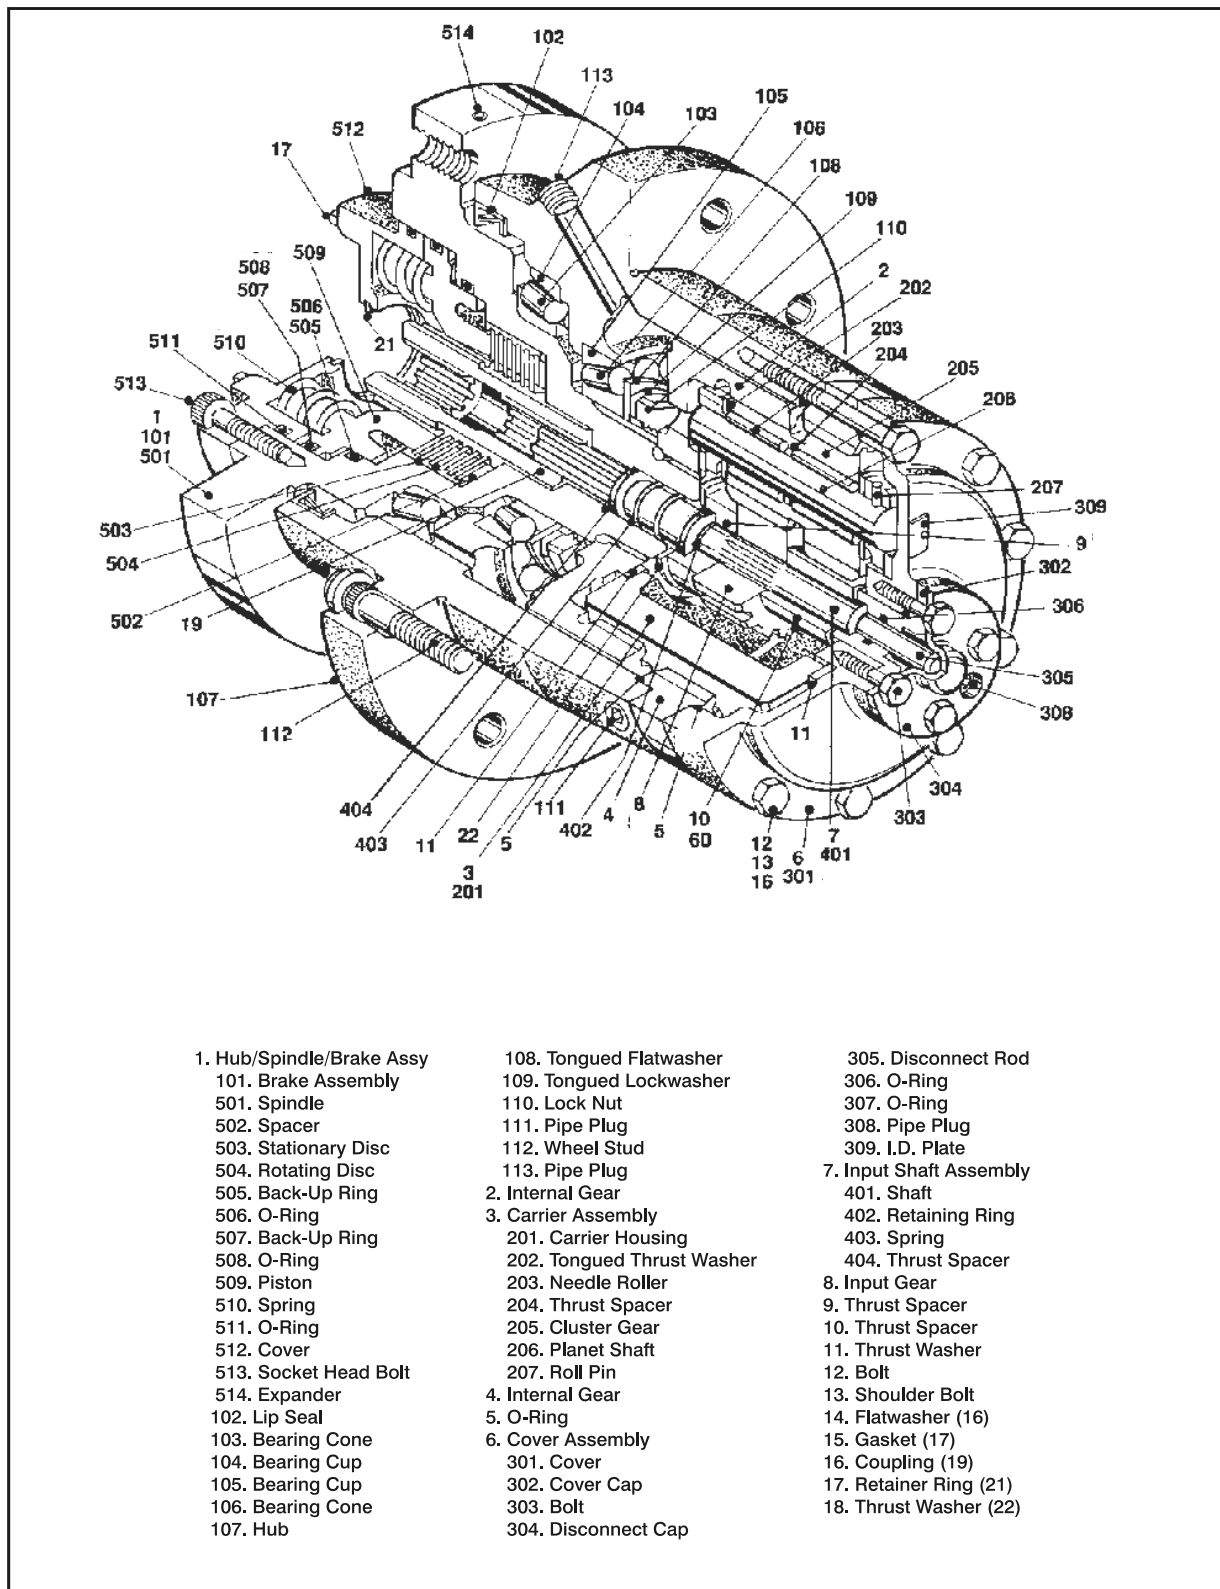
Drive Torque Hub/Brake - 4WD Front
